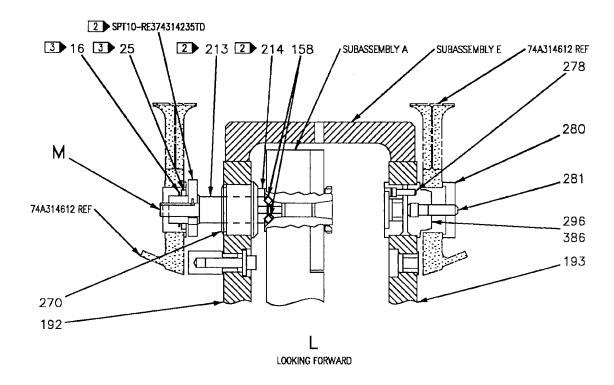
Drag Brace Support Fitting Reaming (Sheet 9)
